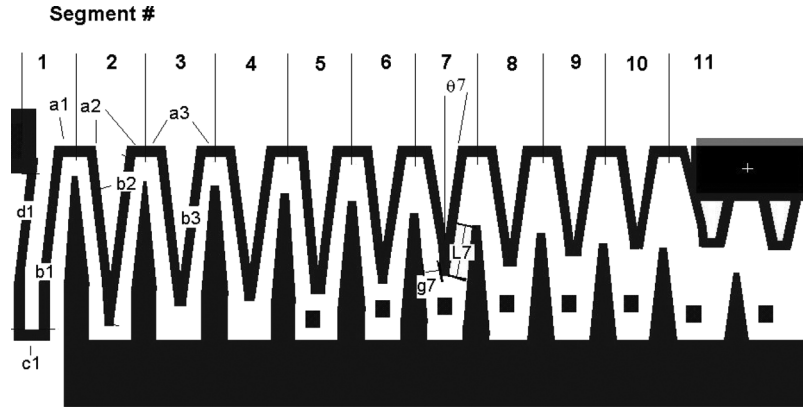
Detailed CAD layout of a typical zigzag design with geometric parameters.
